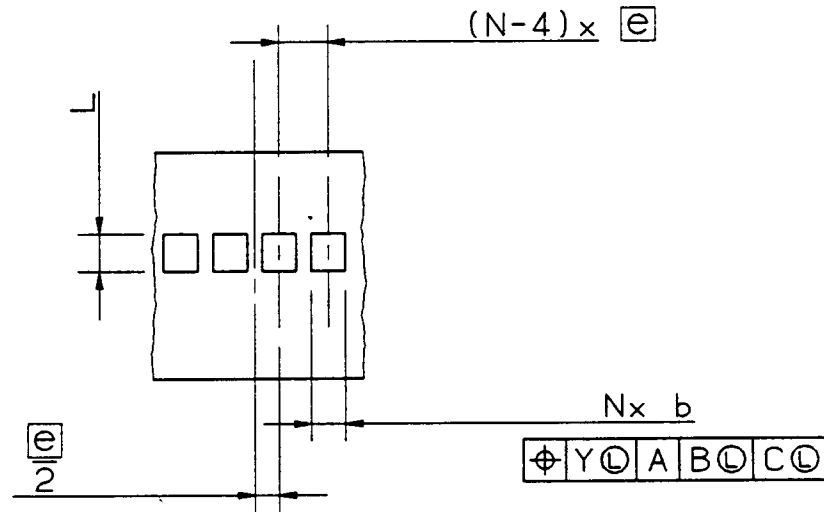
PRINCIPAL DIMENSIONS AND DATUMS
